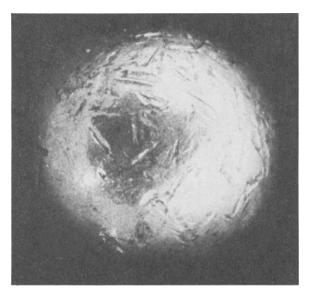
Corbin ball bearing from a lock cylinder that had been picked using a bounce pick. Sall diameter is 2.79 mm (0.110 in.).
